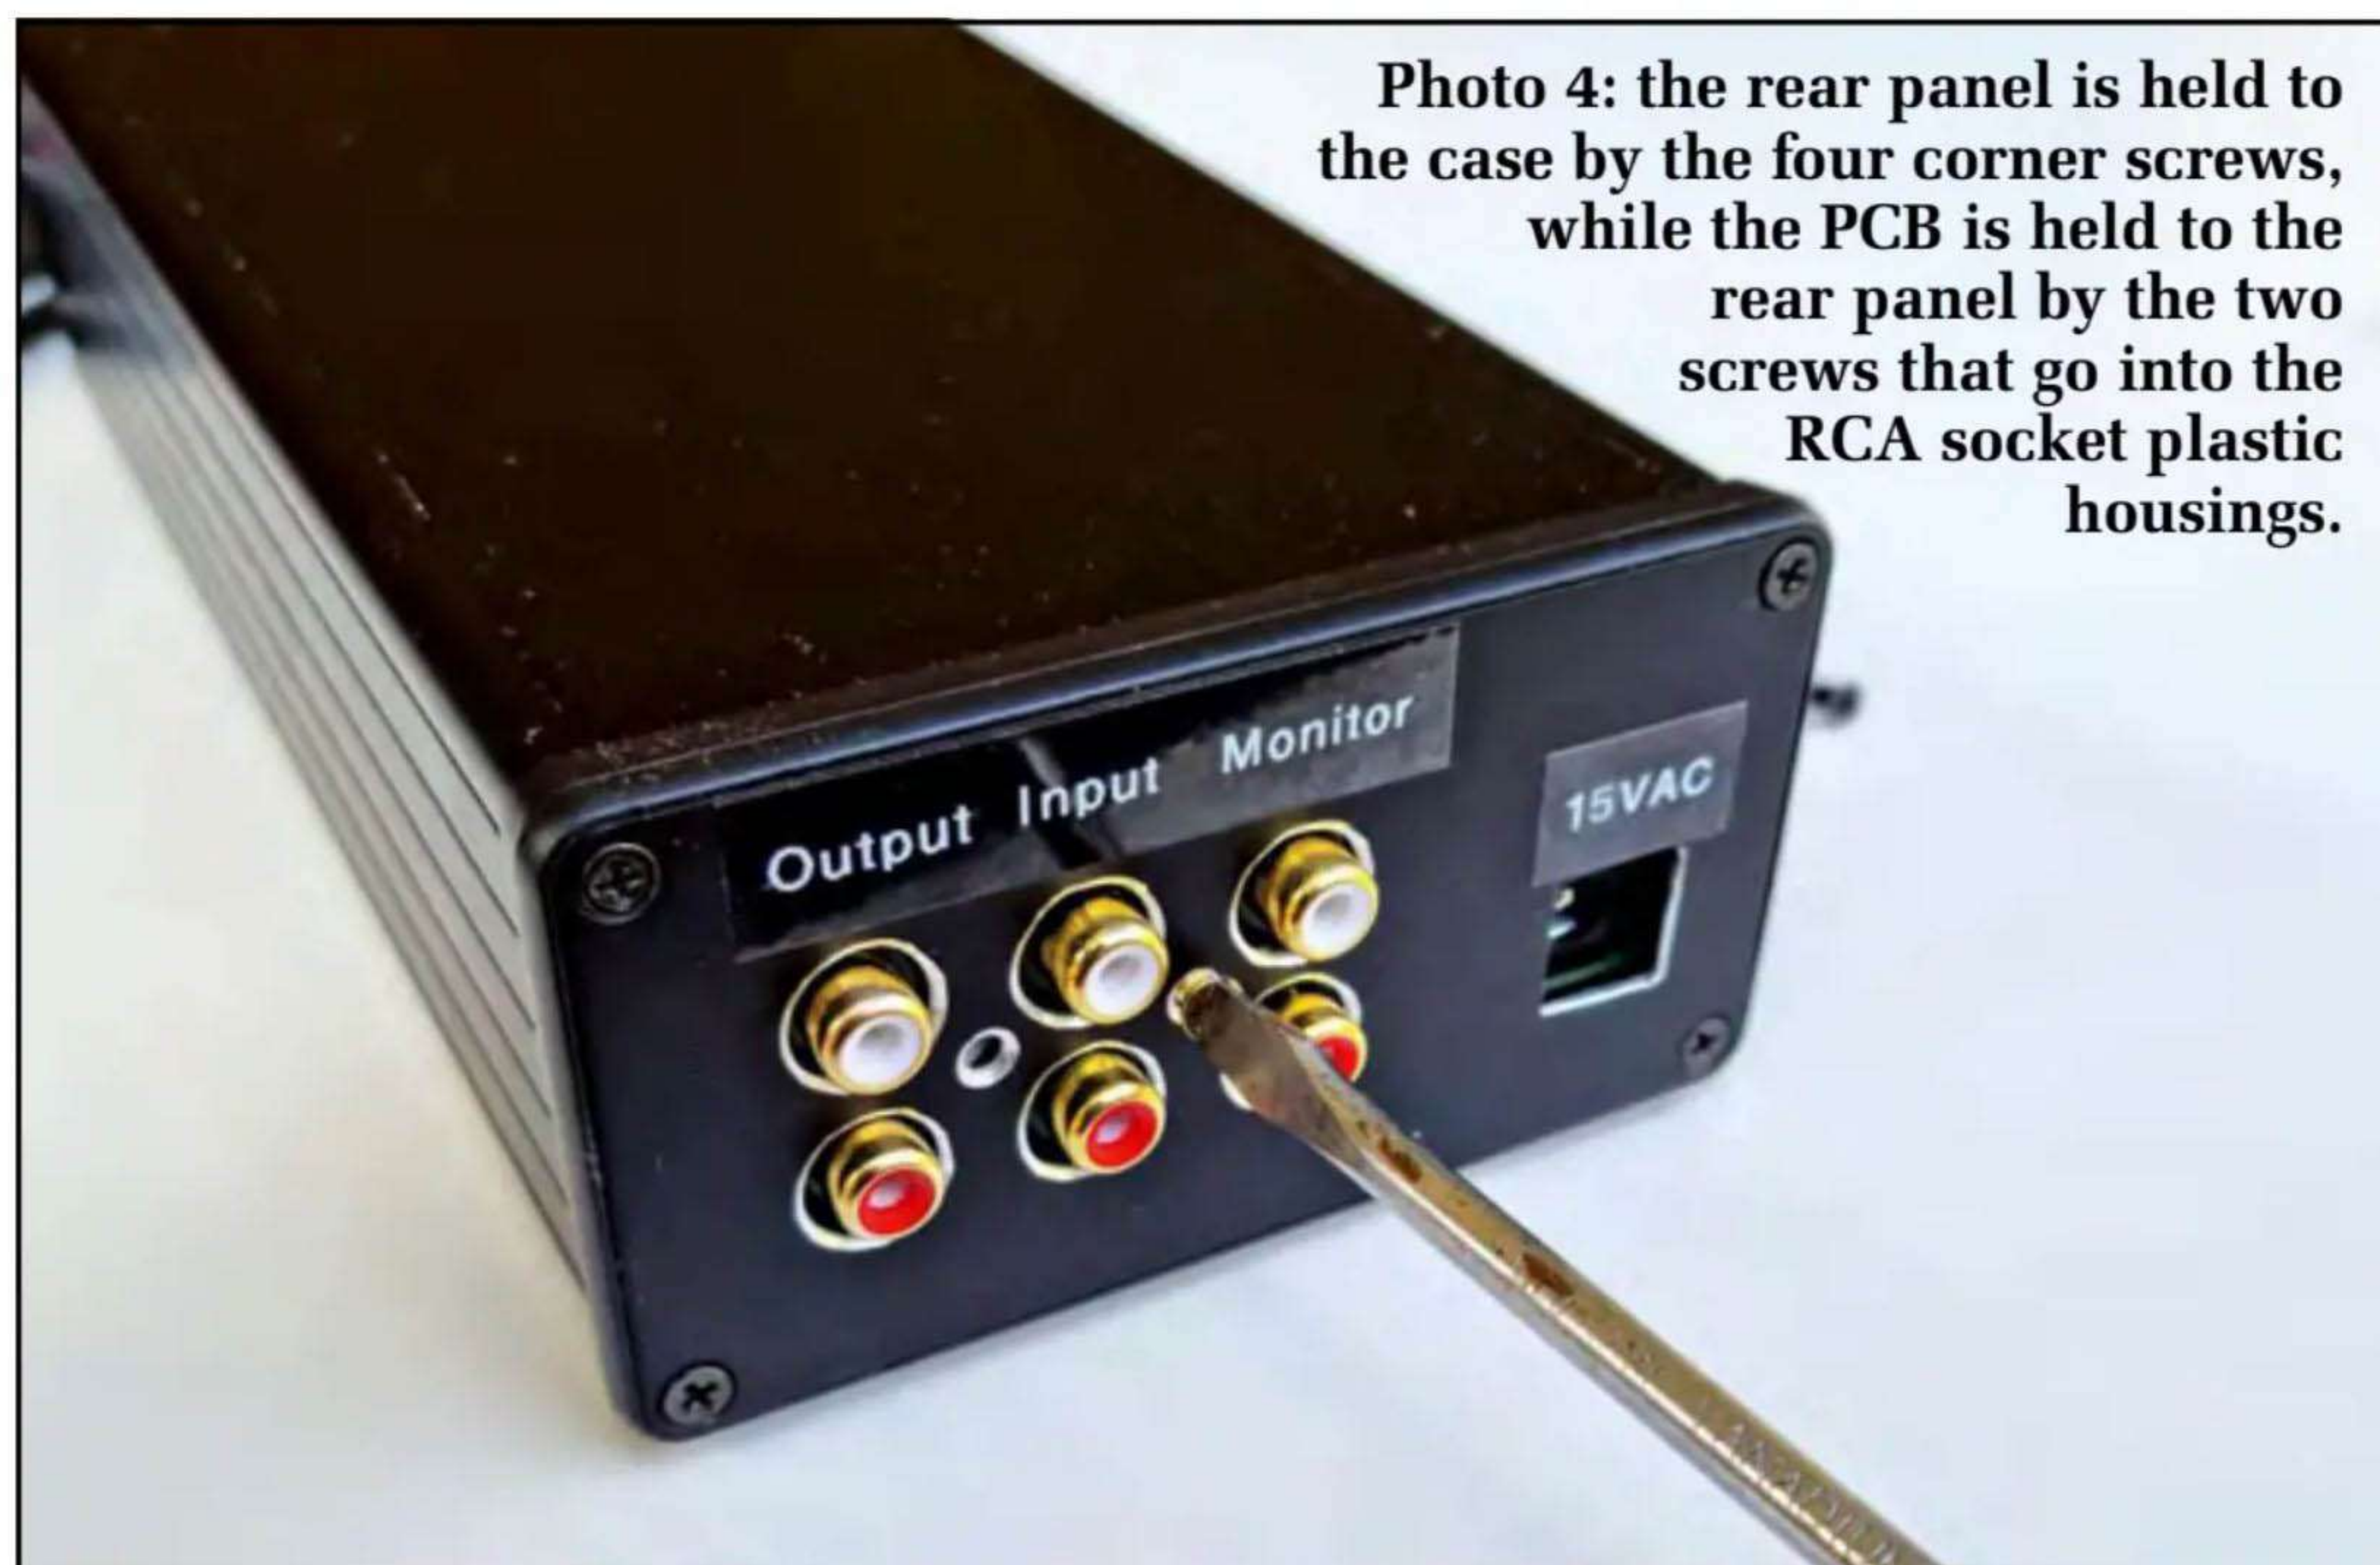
the rear panel is held to the case by the four corner screws, while the PCB is held to the rear panel by the two screws that go into the RCA socket plastic housings.
